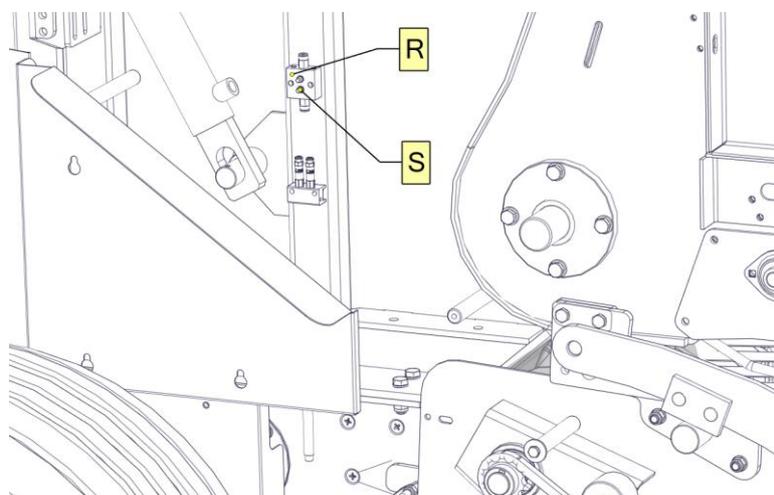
The bearing central lubrication system on the right-hand side of the baler
